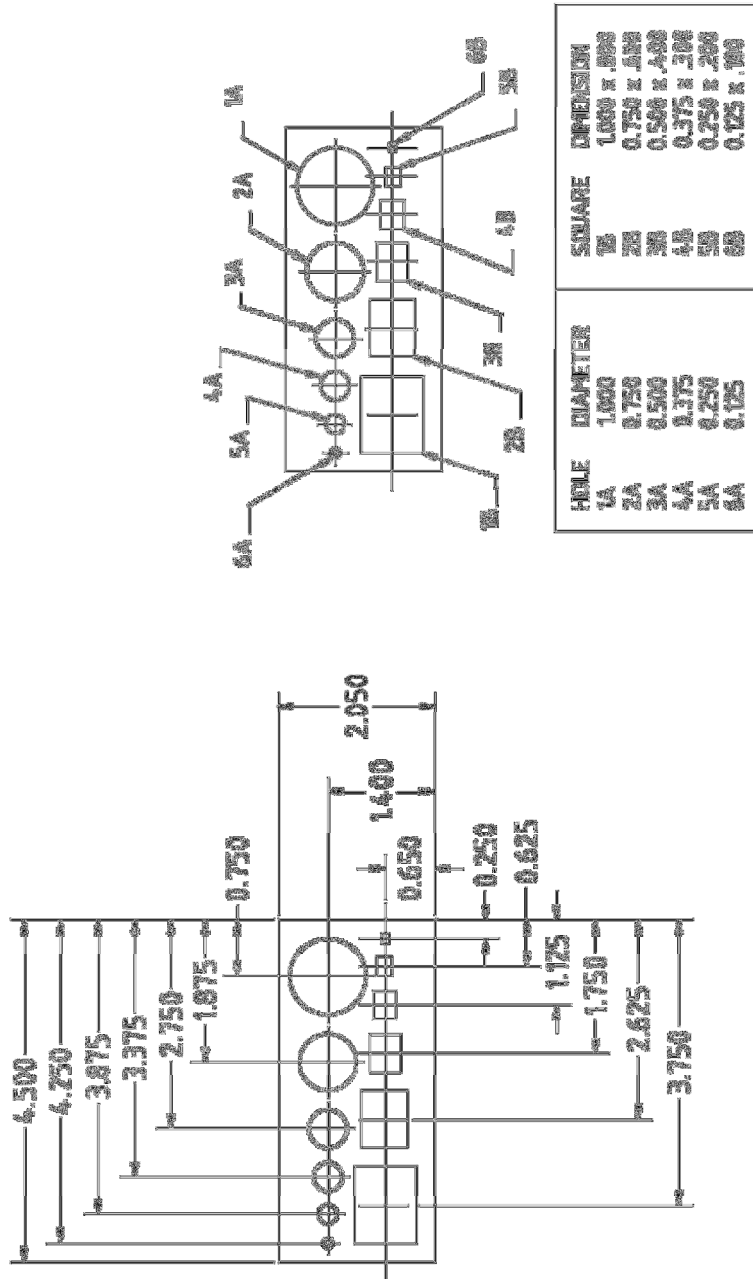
Dimensioned Drawing of a Dots and Squares Slide
